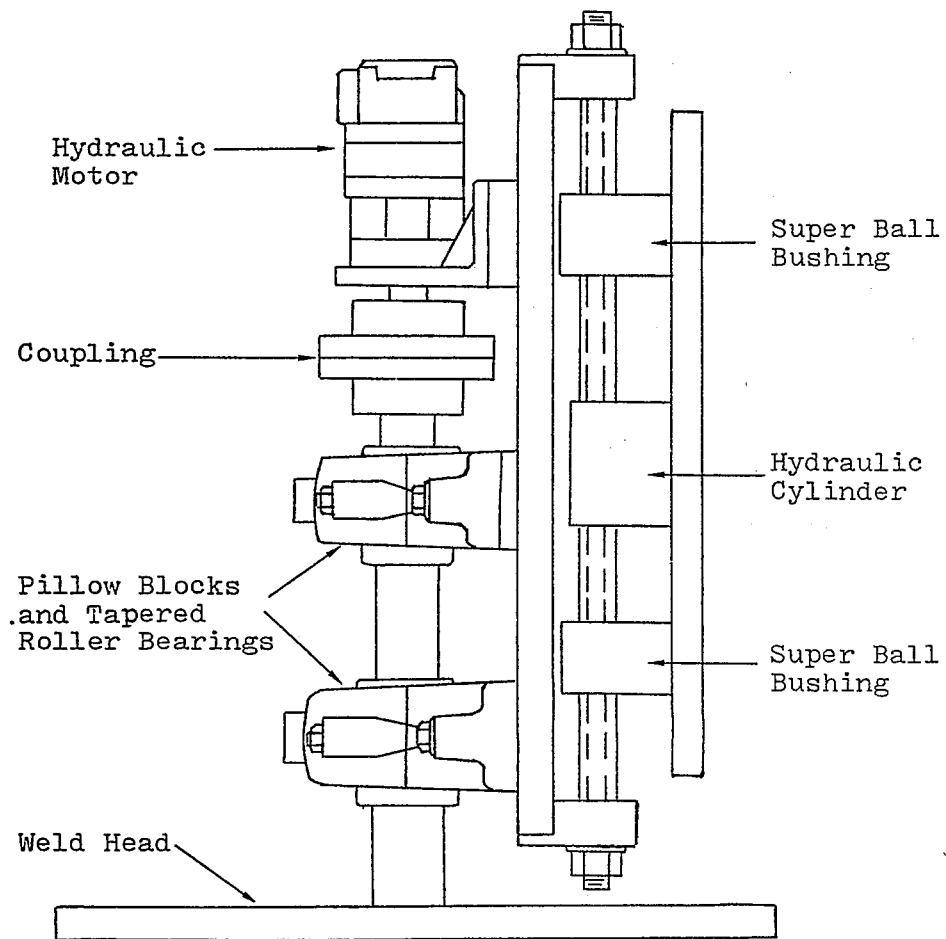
Schematic of Welding Unit Drivetrain.
